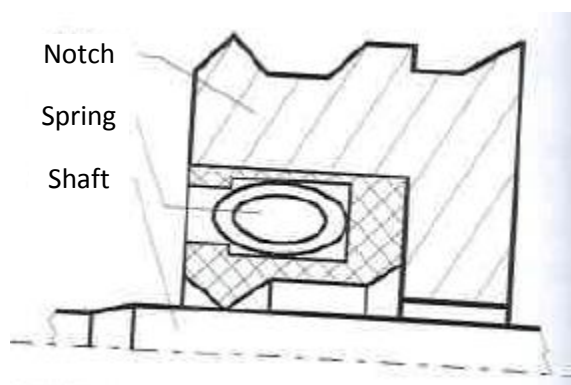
Radial shaft seal on PTFE basis with spring pretension
